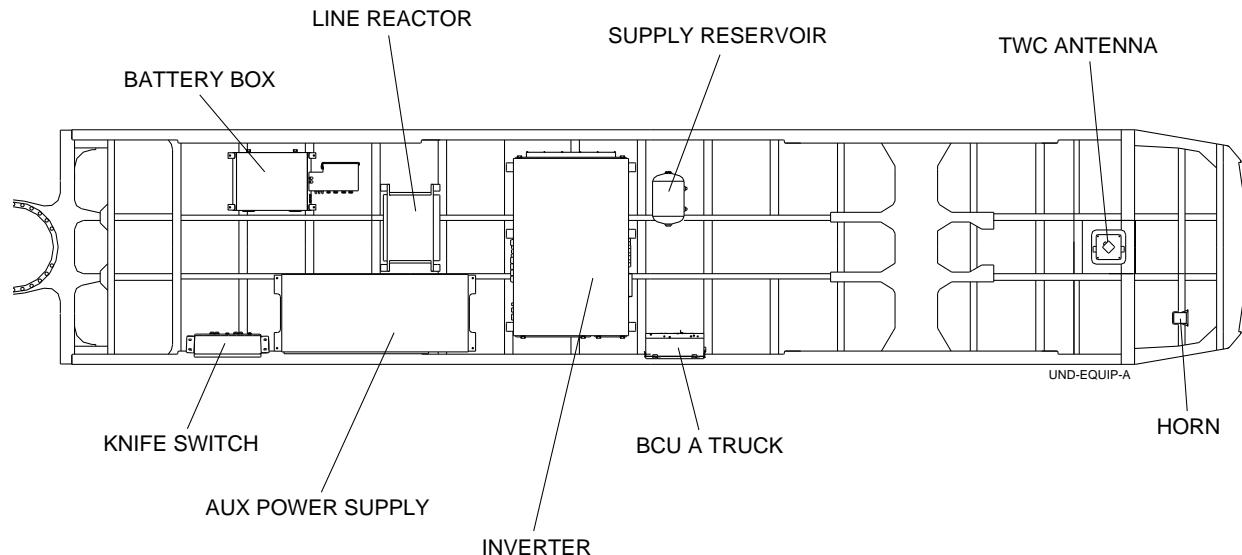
Underfloor Equipment Arrangement, A-Unit
